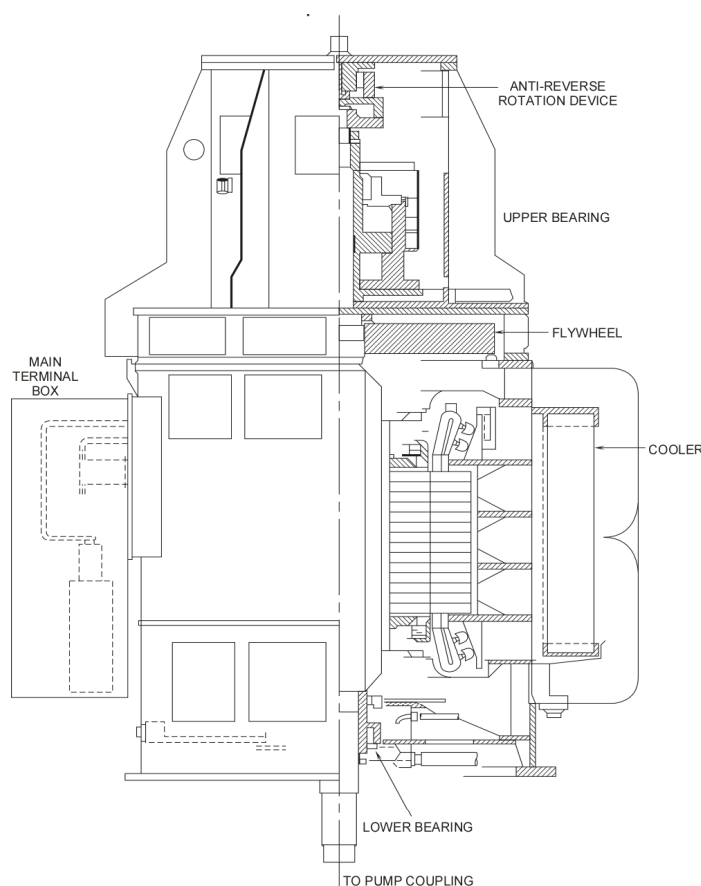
Reactor Coolant Pump Motor Assembly
